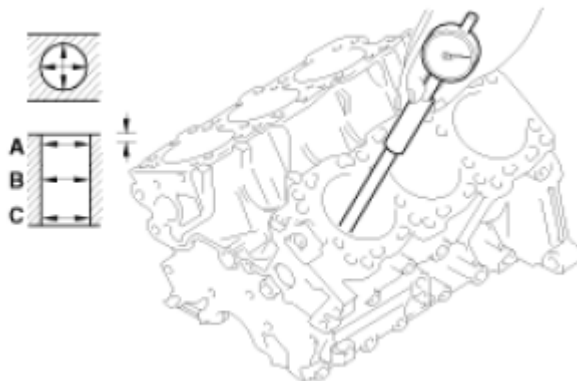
Measuring Cylinder Bore Diameter At Position In Thrust And Axial Directions
